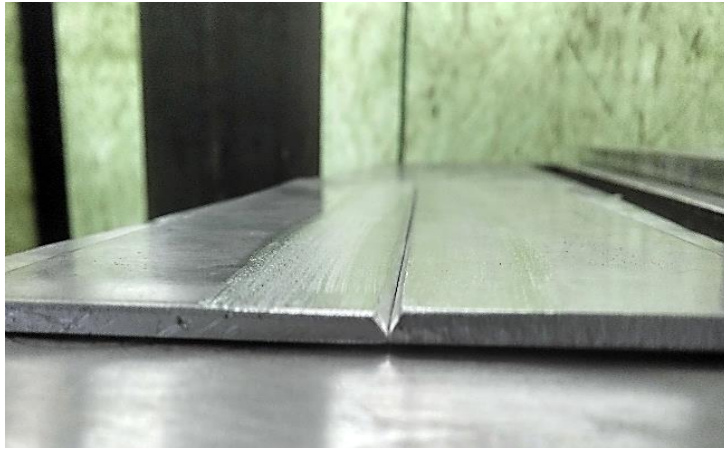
V groove butt joint design for TIG and CMT welding
